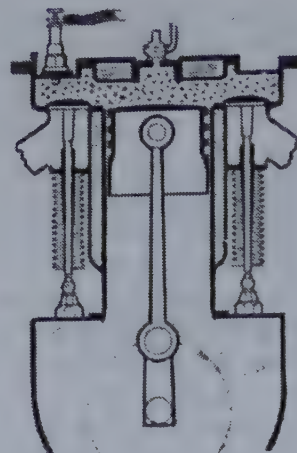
"T" Head "mechanically" operated inlet and exhaust valve.
